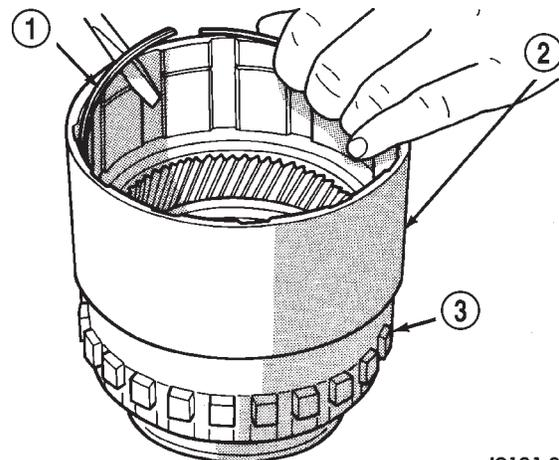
Marking Direct Clutch Drum And Annulus Gear For Assembly Alignment
